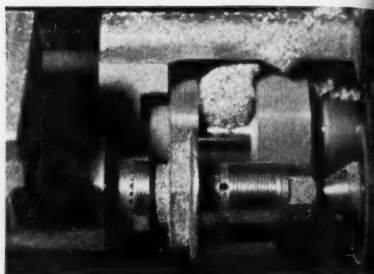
Two threads of different diameters milled simultaneously in this thread milling machine.
